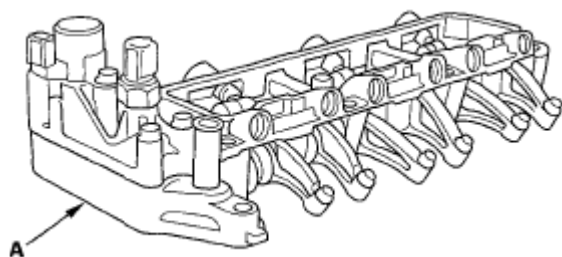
Identifying Front Rocker Arm Oil Control Valve
